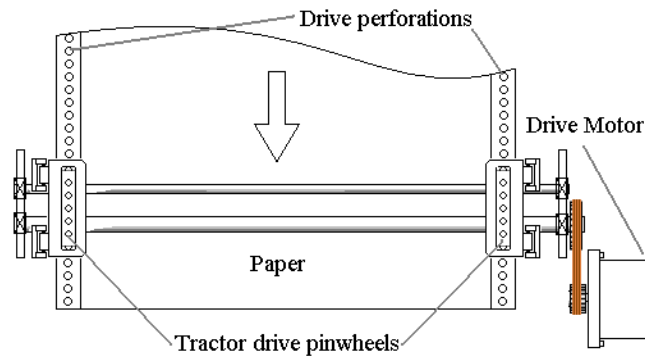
A diagram showing an example of a tractor paper drive used to drive the transfer belt
